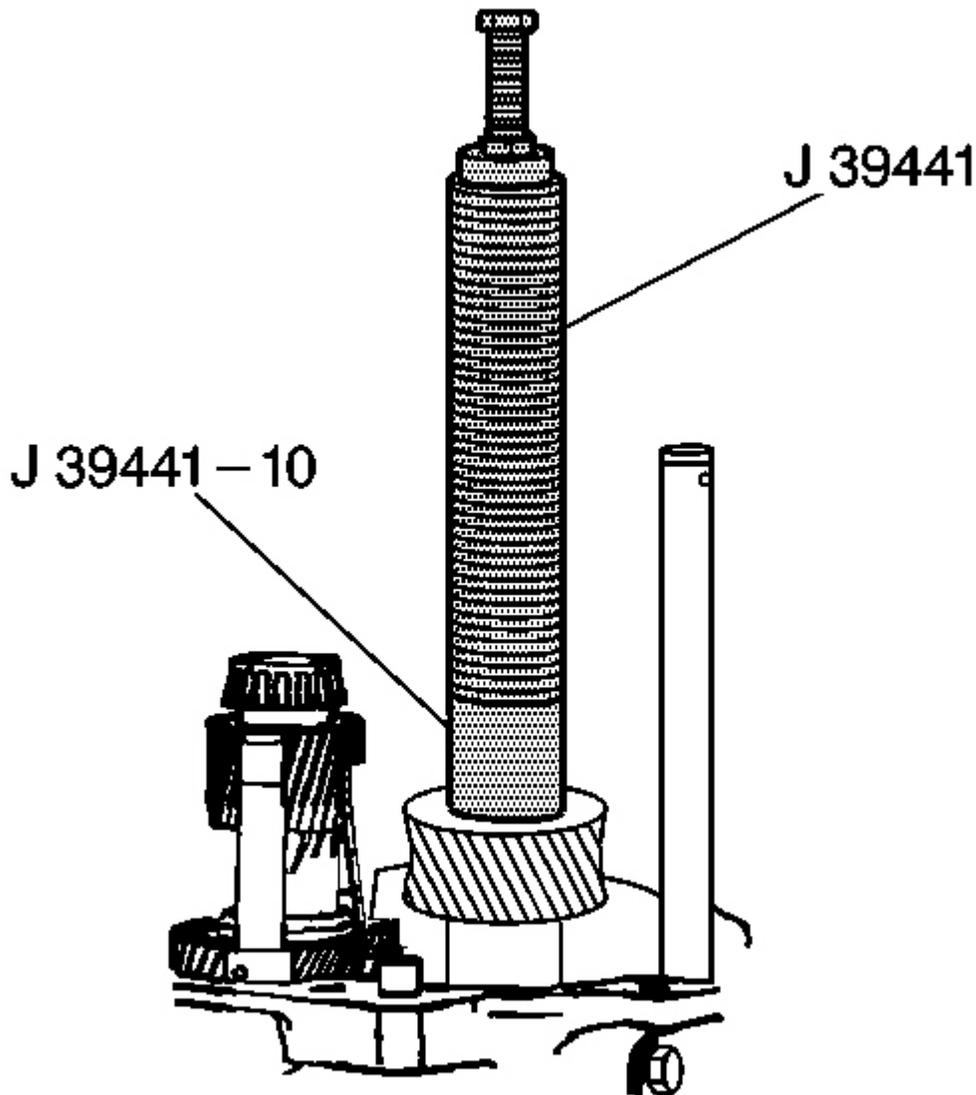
Installing/Removing 5th/6th Speed Driven Gear
